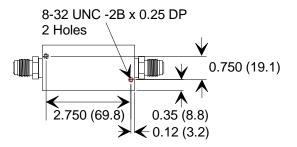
Mounting Dimensions of the 1179 Flow Controller
